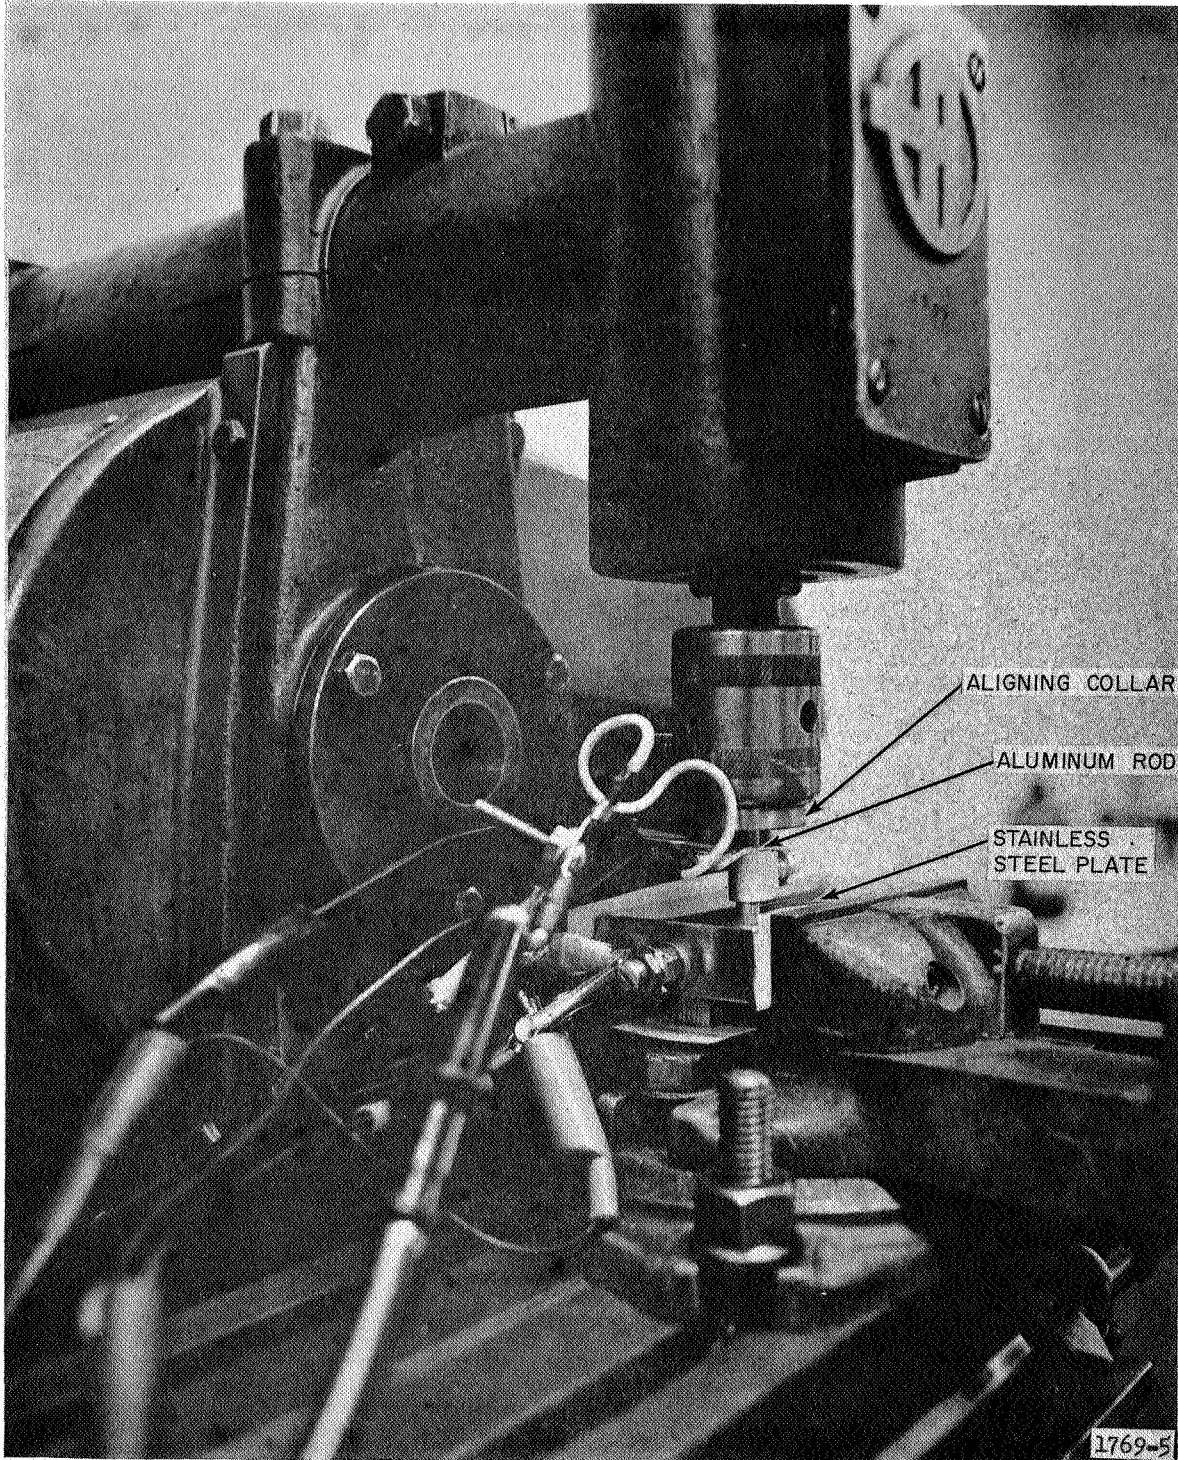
DETAIL OF TEST ASSEMBLY FOR PLATEAUIING EXPERIMENTS
